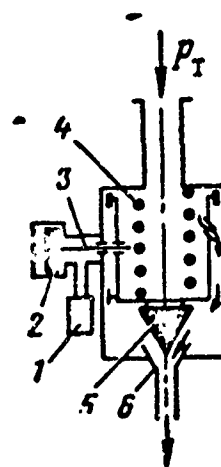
Diagram of a normally open explosive valve with a check device: 1 - explosive cartridge; 2 - piston; 3 - lock pin; 4 - spring; 5 - valve; 6 - seat.
